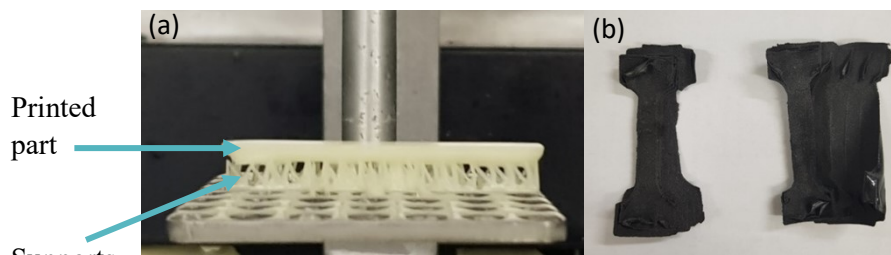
(a) Example of point supports for flexure-test samples BN 1, and (b) slippage between layers of GNP 1 tensile test specimen.
